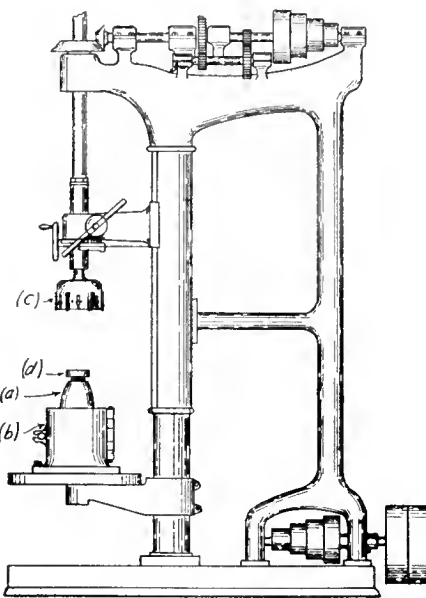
TIGHTENING SHELL SOCKETS ON A DRILL PRESS.
